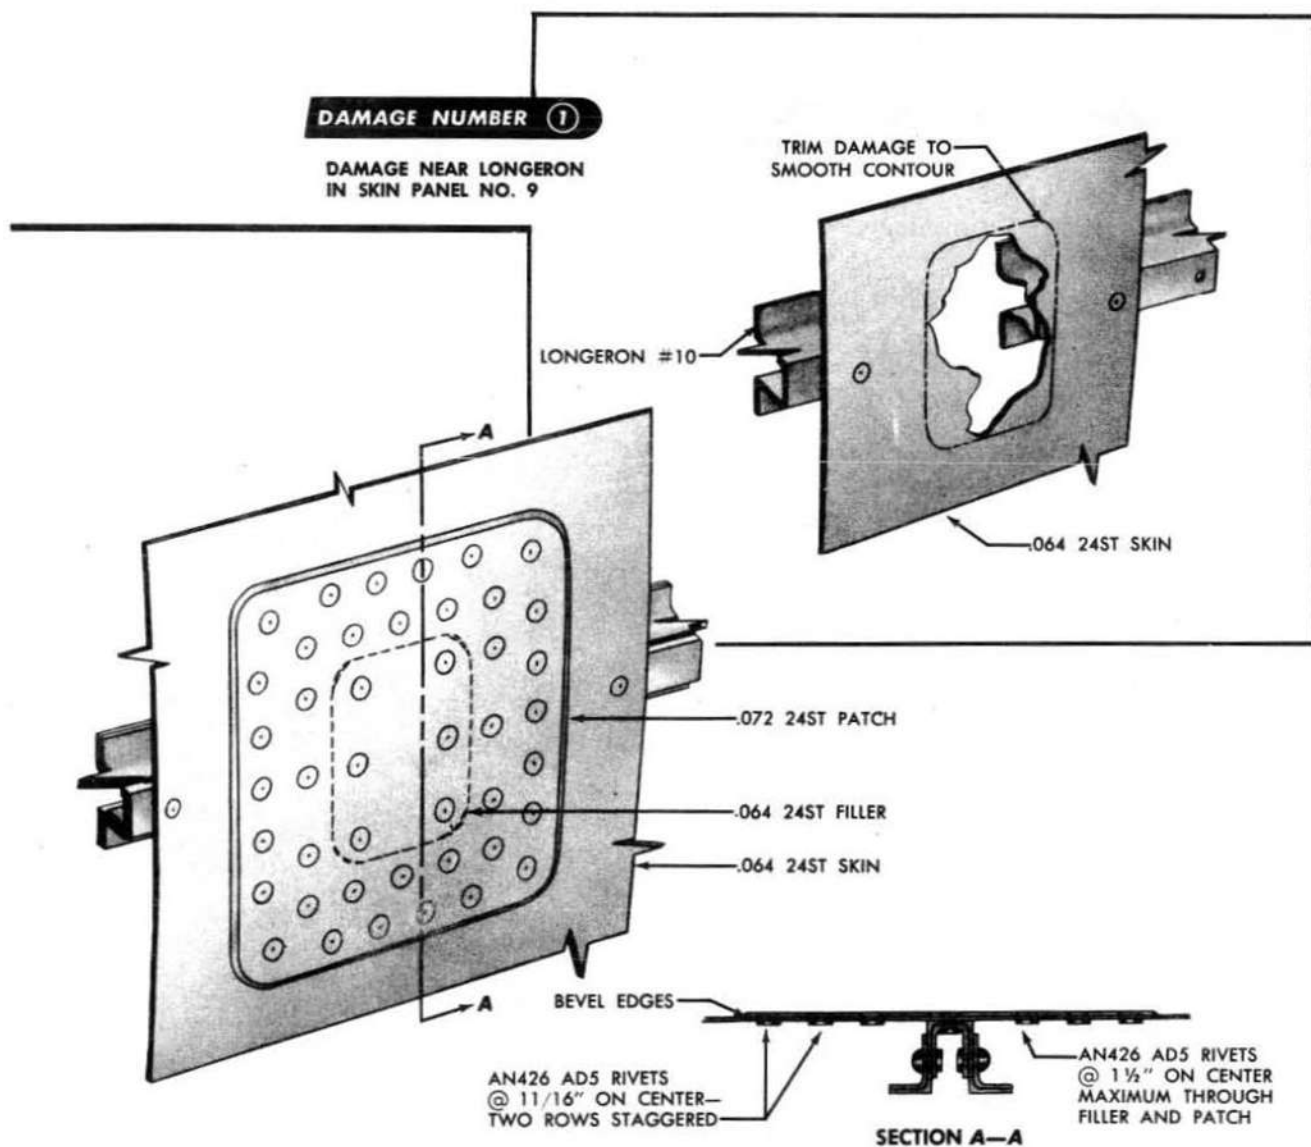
Key Drawing of Damages to Fuselage Skin Plating
